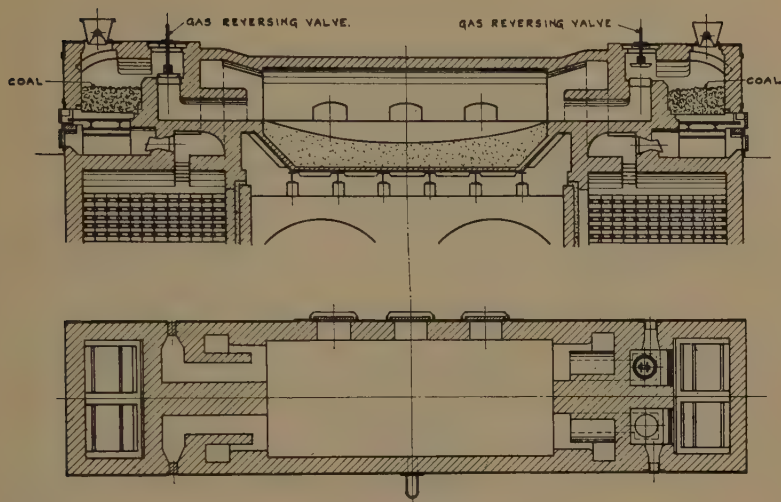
Early type of open-hearth furnace, showing gas reversing valve.
